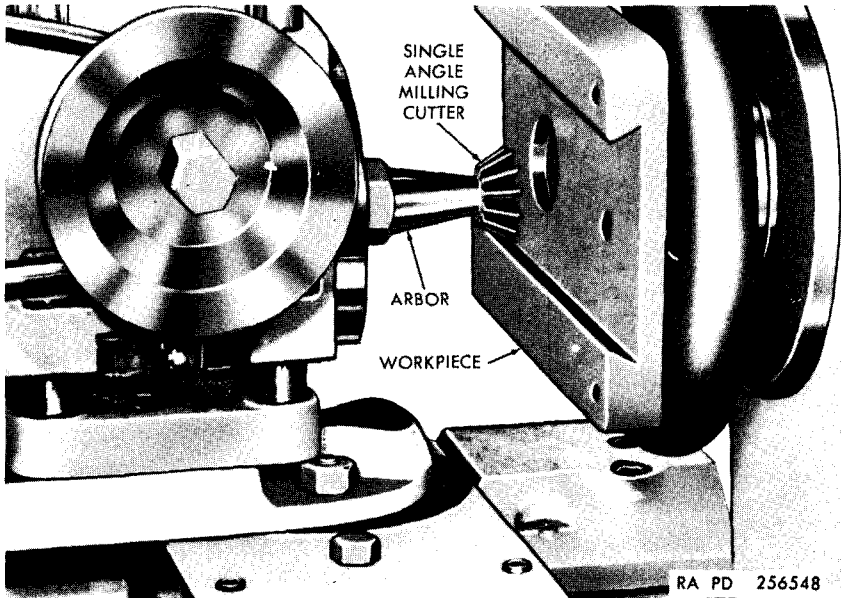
Angular milling of dovetail using the milling and grinding lathe attachment.
